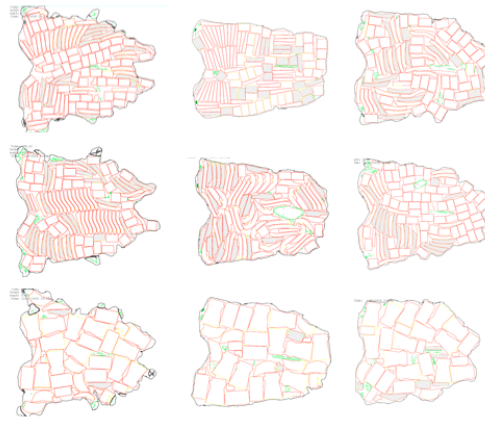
Pieces positioned for cutting. On the left, hides of Shape A; in the center, Shape B; and on the right, Shape C.
